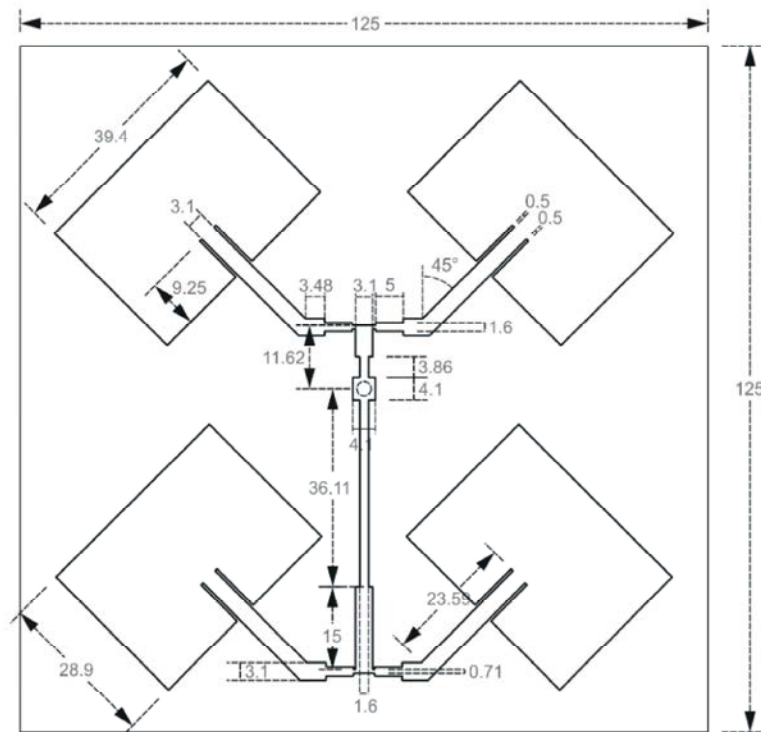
2x2 planar antenna array geometry with dimensions in millimeters
